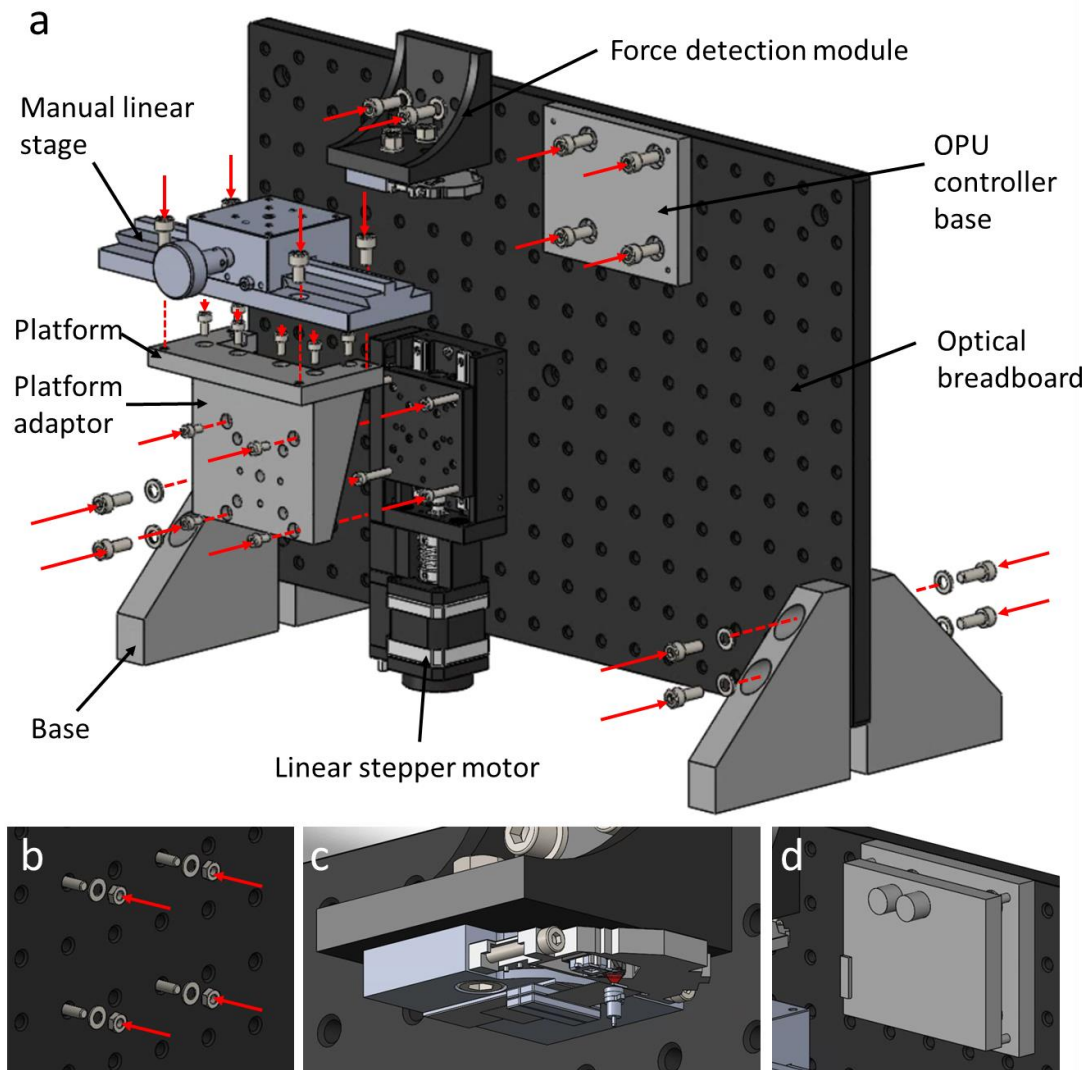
Assembly diagram of a) the whole system, b) fixing the linear stepper motor (view from the backside of optical breadboard), c) fixing the force detection module with cantilever force transducer, and d) fixing the OPU controller.
